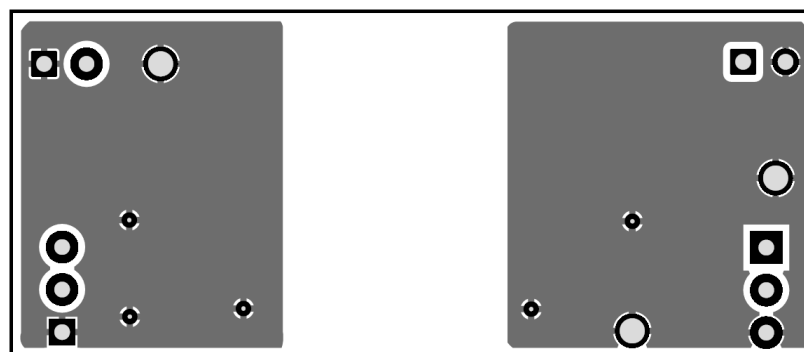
AMC14xx Bottom Silkscreen Drawing
